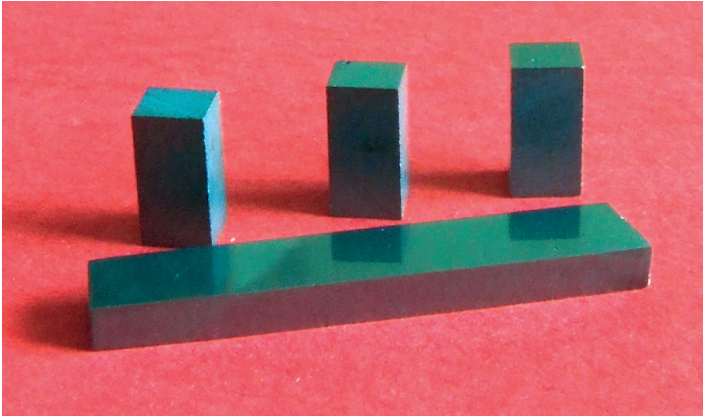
Pictures of several EDM machined samples after finishing (HIP Si₃N₄/MoSi₂ with 10 wt.% CeO₂)
